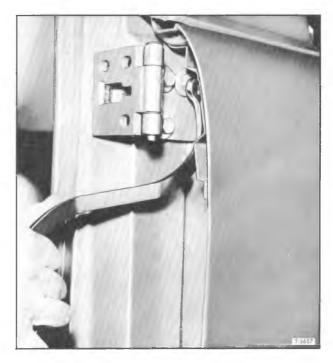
Door Hinge Bolt Wrench J-22585 (Typical)
